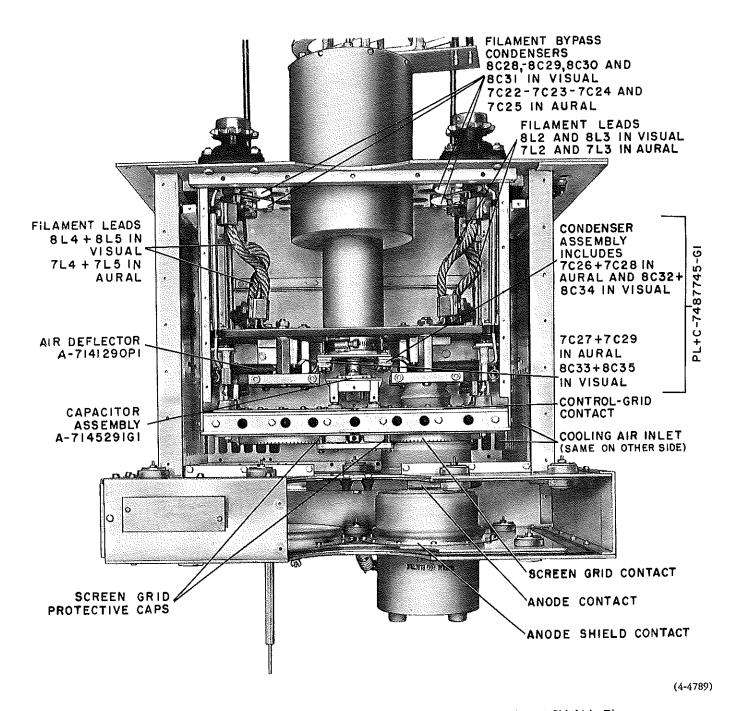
Cavity in Process of Construction: Anode Contact Assembly and Shield in Place, One Tube Installed, Rear View
